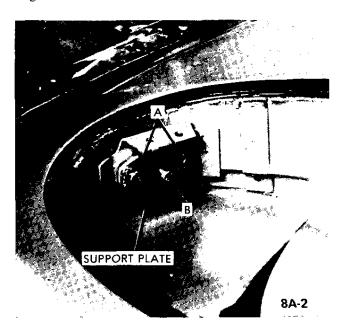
A-2 Headlamp Assembly Front Adjustment Location
